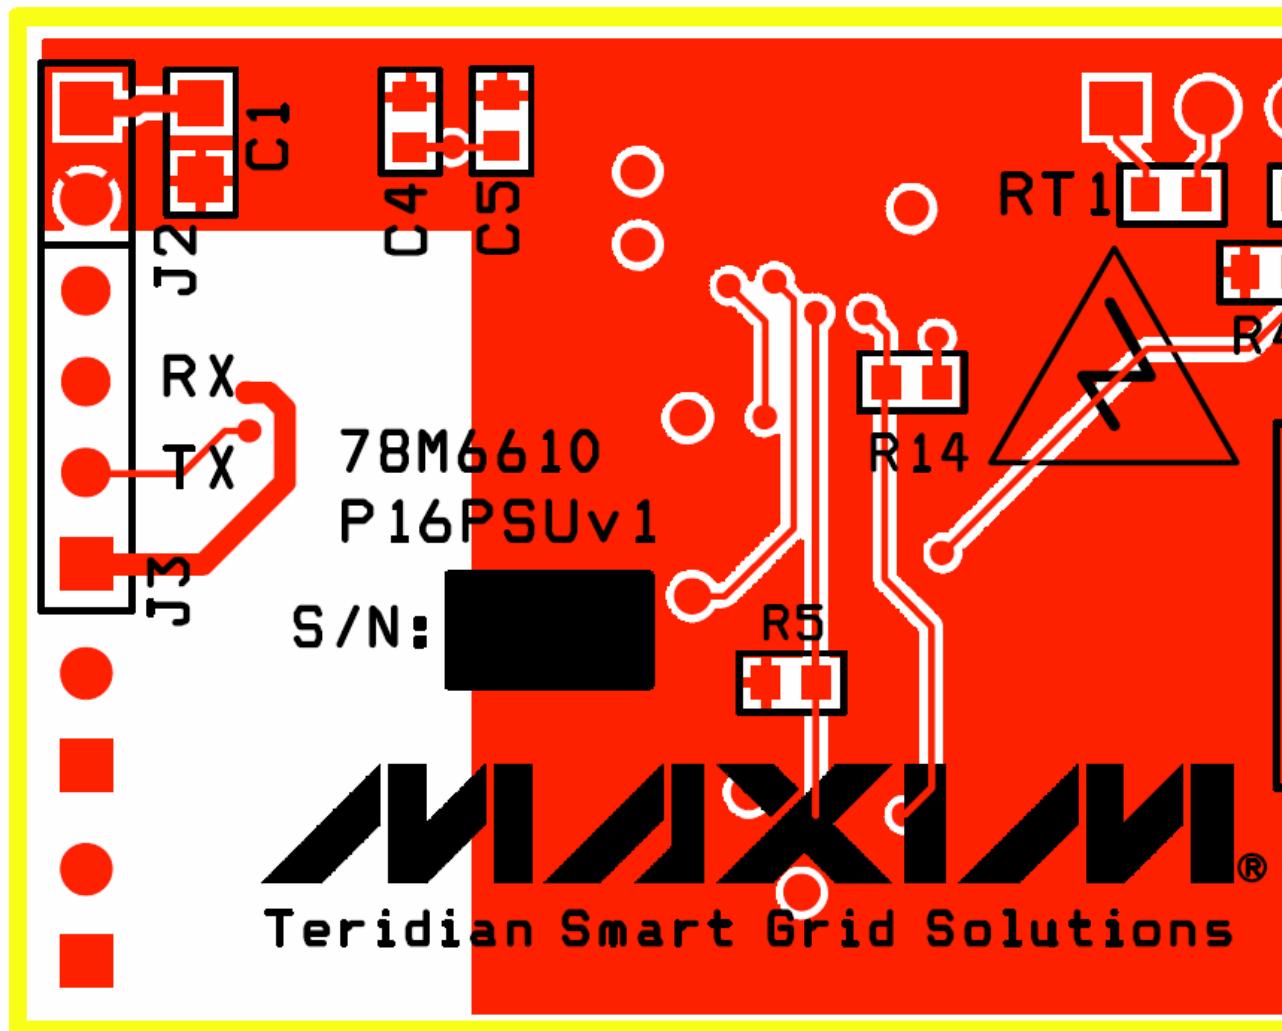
78M6610+PSU 16-Pin Evaluation Board PCB Bottom View
